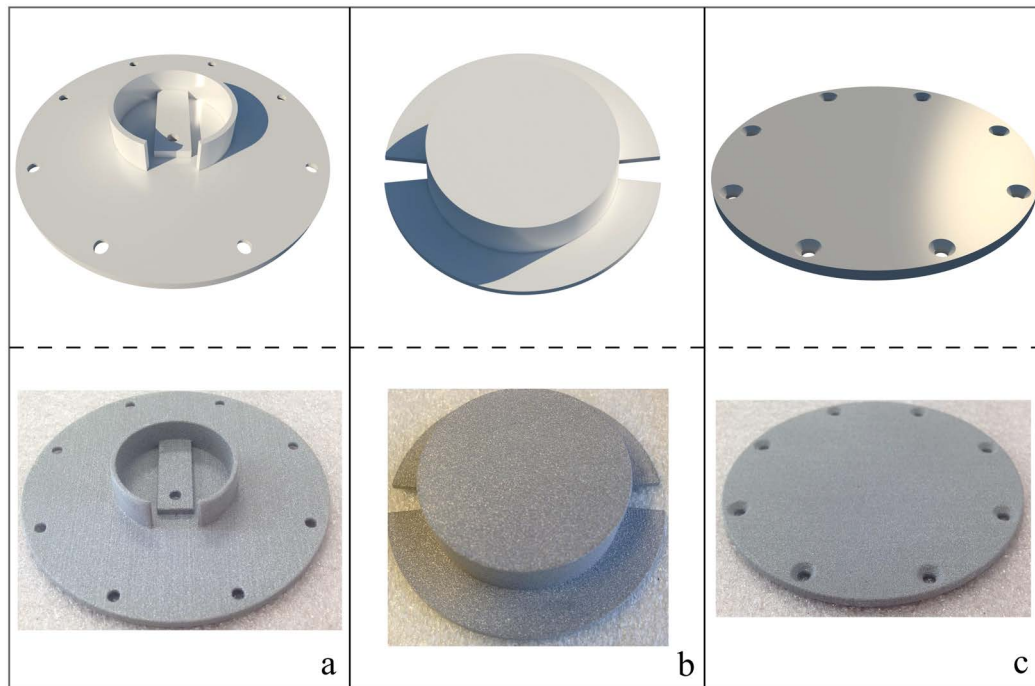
3D printed components of an instrumented DMT blade: (a) removable cover A; (b) Piston; (c) Removable cover B.
